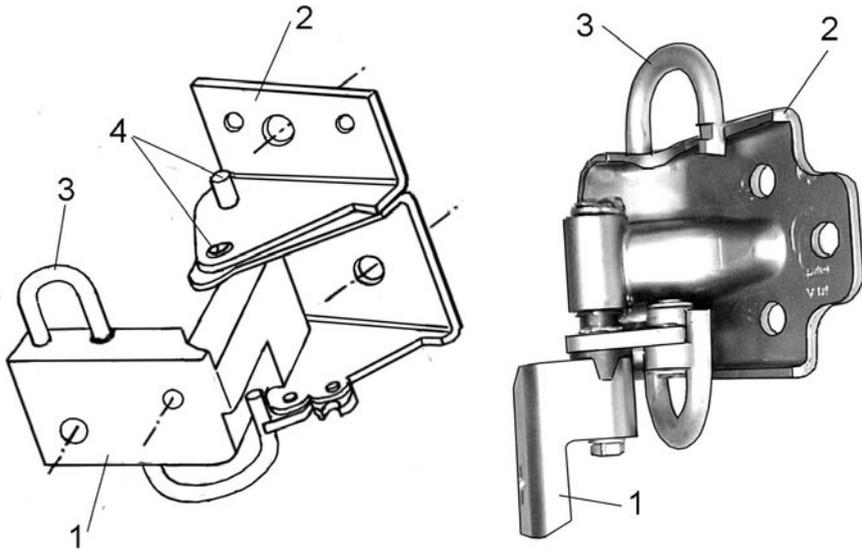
Examples of door hinges with incorporated brake: 1) fixed hinge; 2) movable hinge; 3) brake spring; 4) reference and centering pins.
